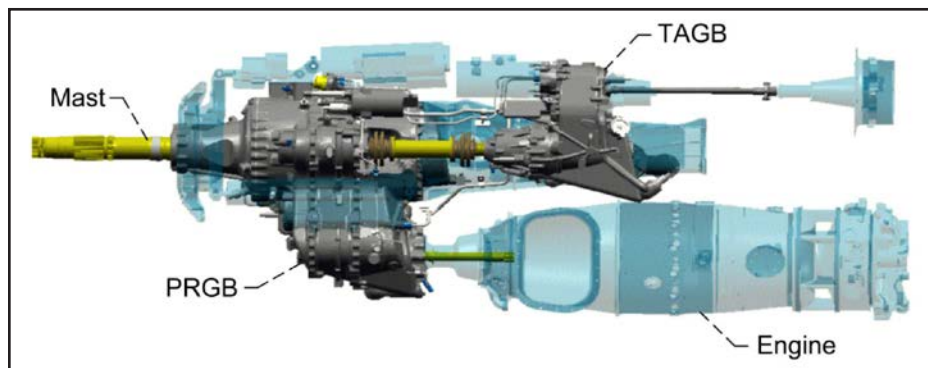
Propulsion system components that reside within aircraft nacelle — tilt axis gearbox (TAGB), and prop-rotor gearbox (PRGB).
